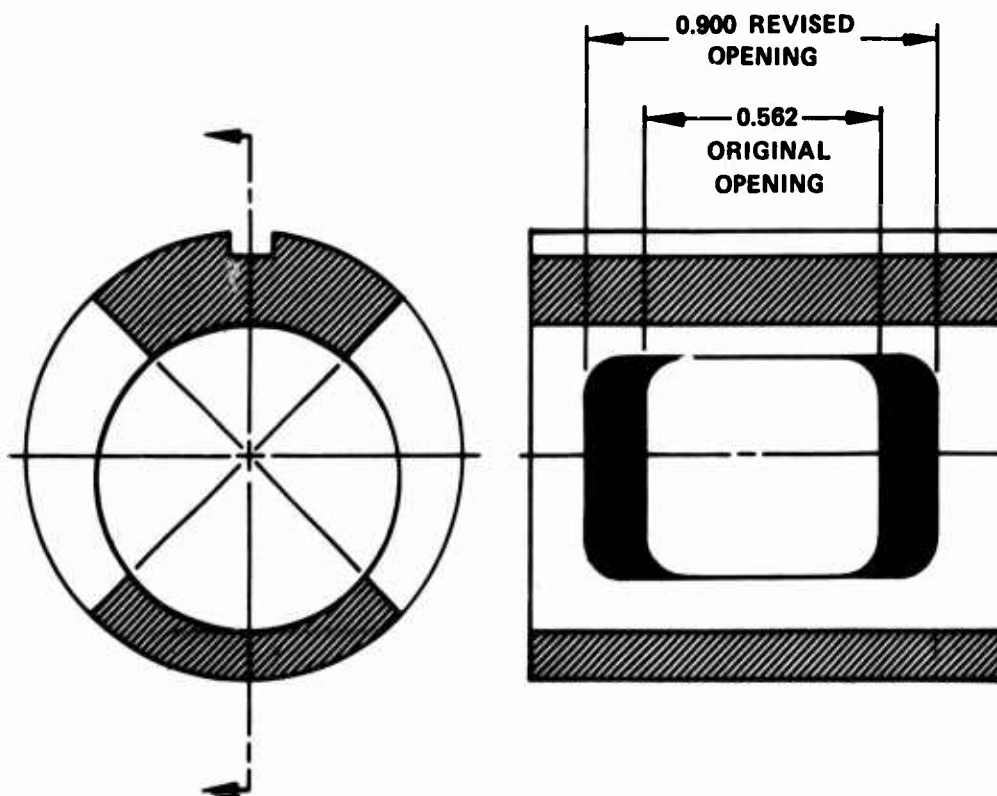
Oil Pump Element Liner Showing Material Removed From Inlet Opening
